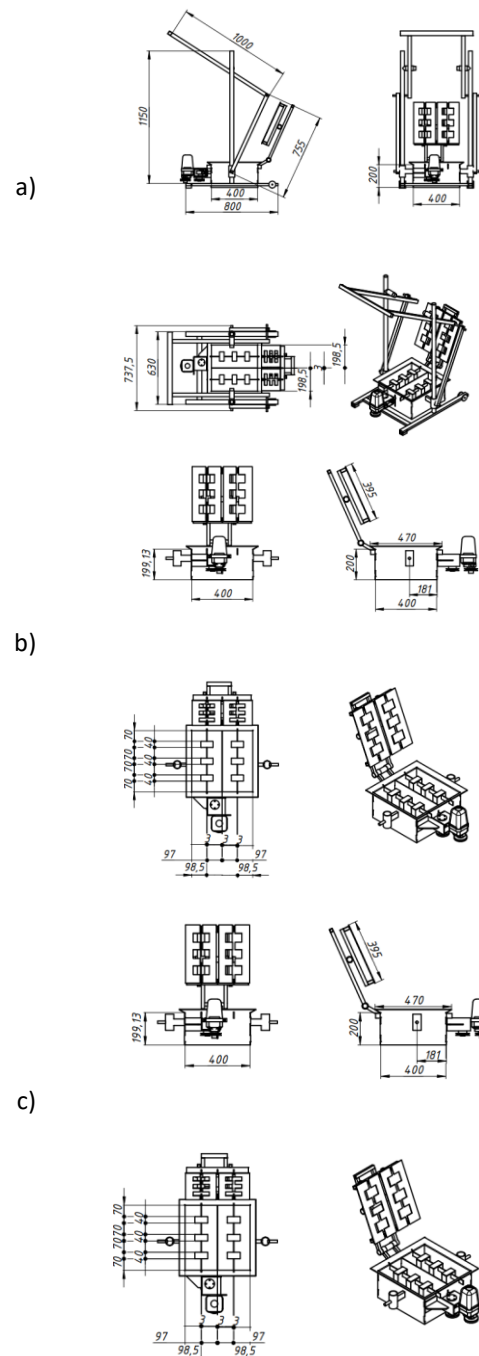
Structural design of the device assemblies for the production of construction blocks (a) general view of the unit, (b) mold for extruding construction blocks with vibrator, (c) extrusion mechanism for construction blocks).
